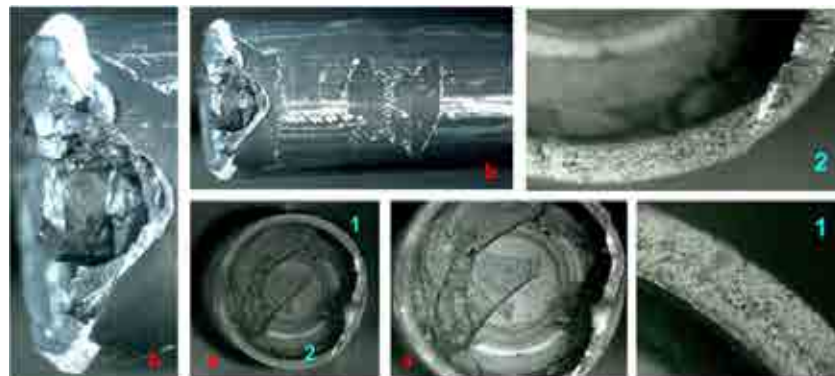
Images taken from the fracture surface of the second fuel rod segment. a) Fracture surface of the rod end fixed in the aluminium block and b) Fracture surface of the long, free end.
